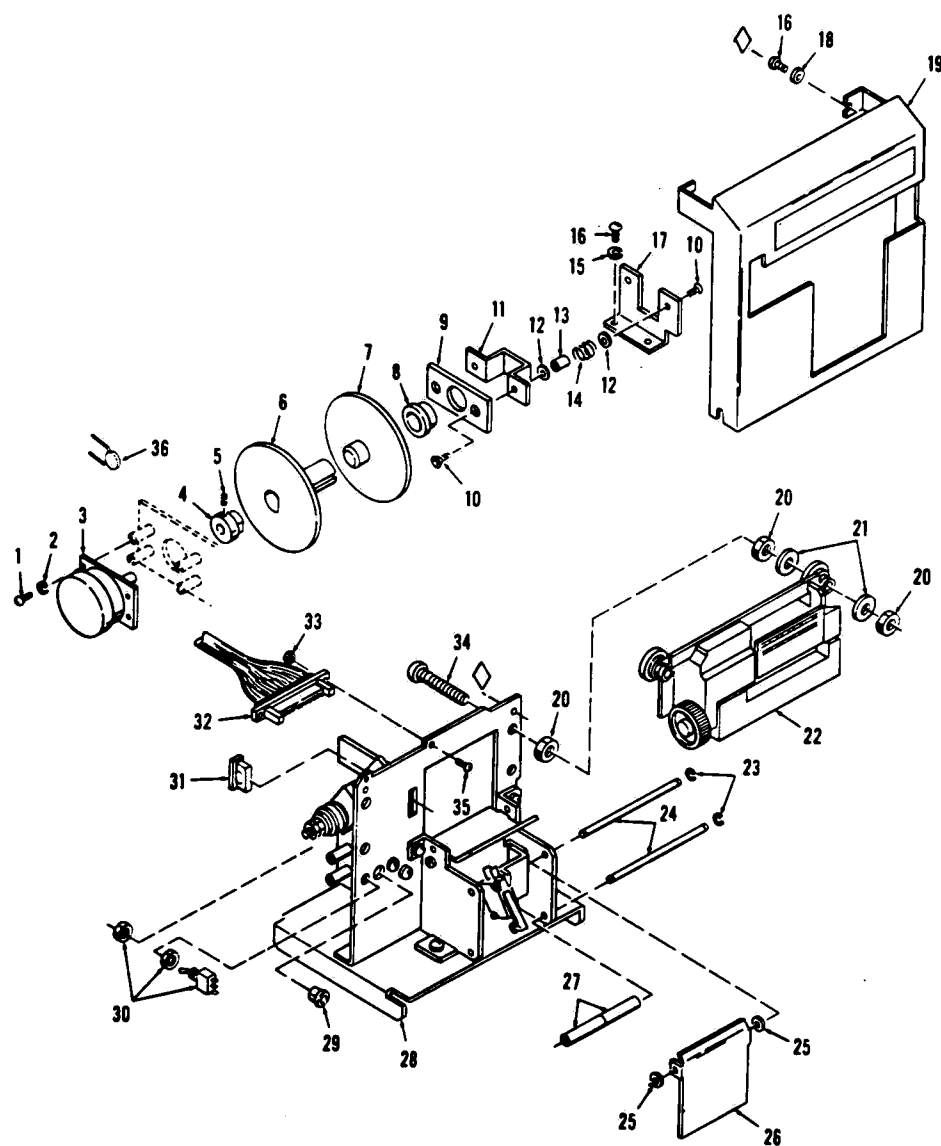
PRINTER FRAME ASSEMBLY (Part 1 of 2).
